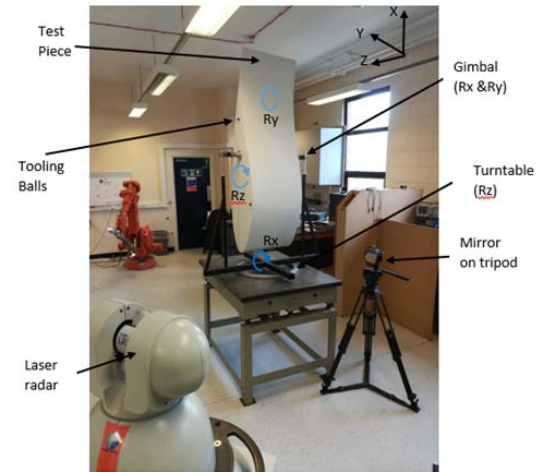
Half-sized cross-section wind turbine blade test piece on a gimbal and turntable with the assisting mirror
